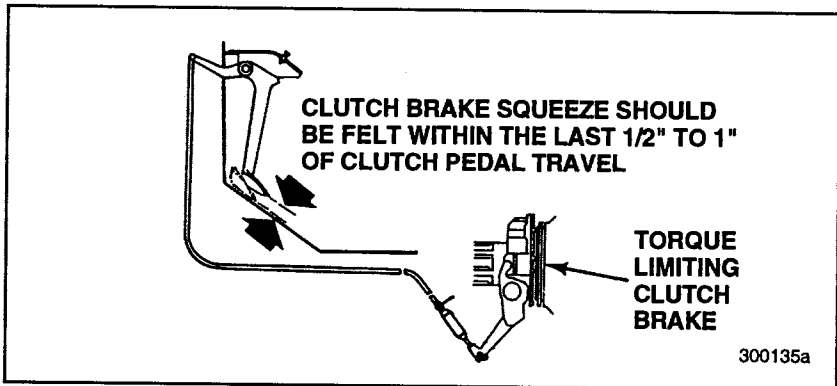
Clutch Brake Squeeze — Spicer Solo
